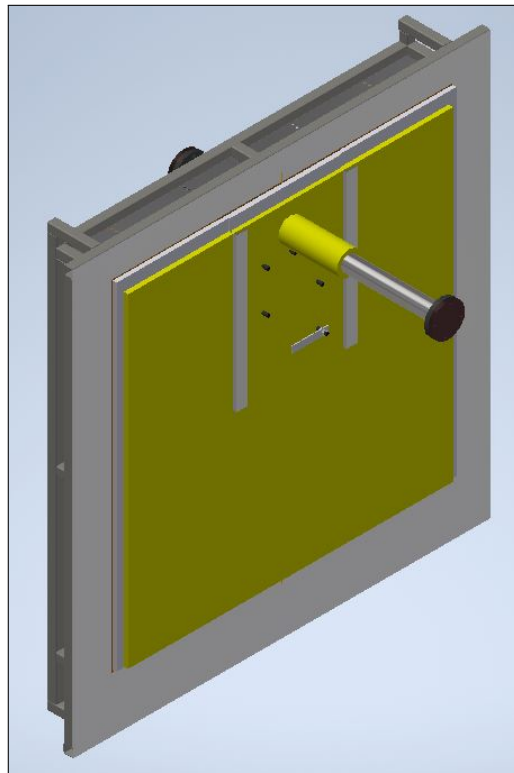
Navy bulkhead shown with the test specimen fully mounted with the insulation on the exposed side (test configuration)
